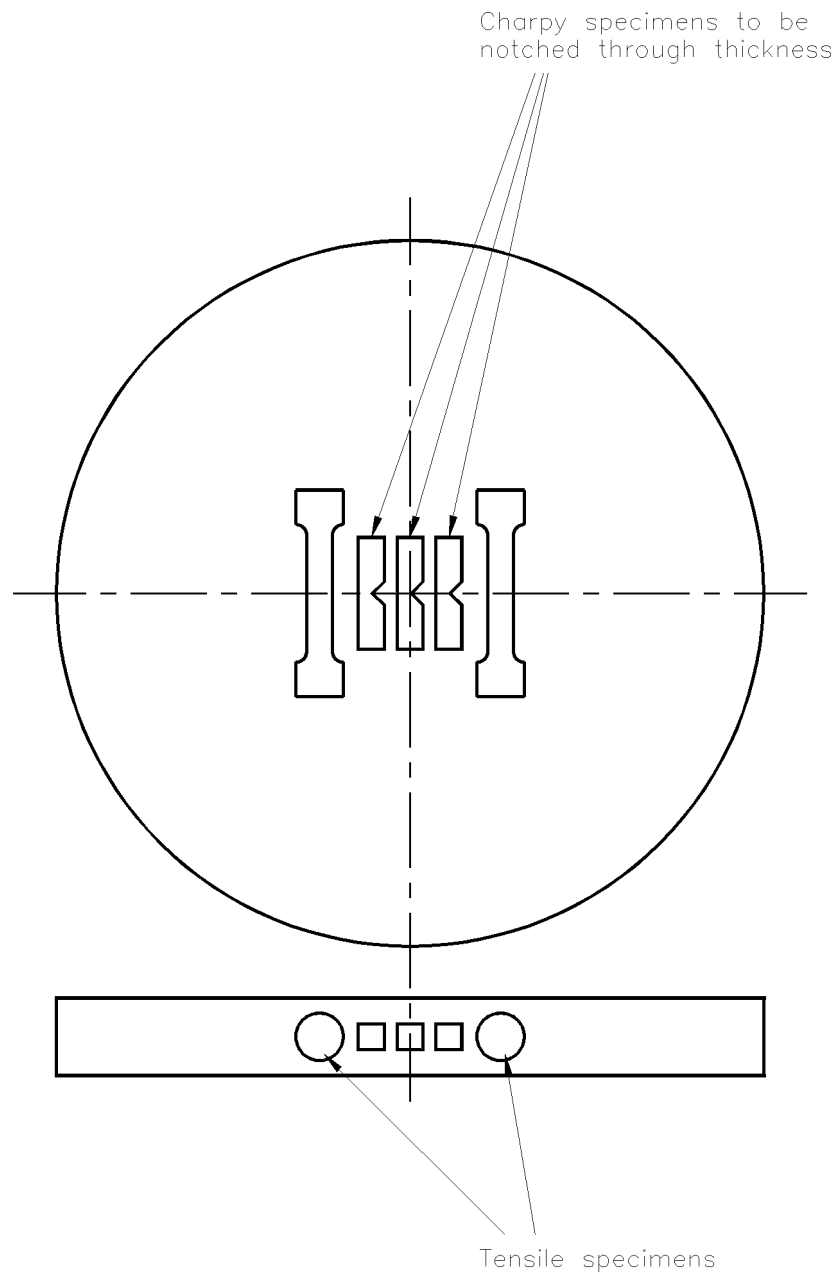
FIGURE C SCHEMATIC SECTION OF A BLIND FLANGE SHOWING THE LOCATION OF THE MECHANICAL TEST SPECIMENS FOR APPROVAL TESTING
